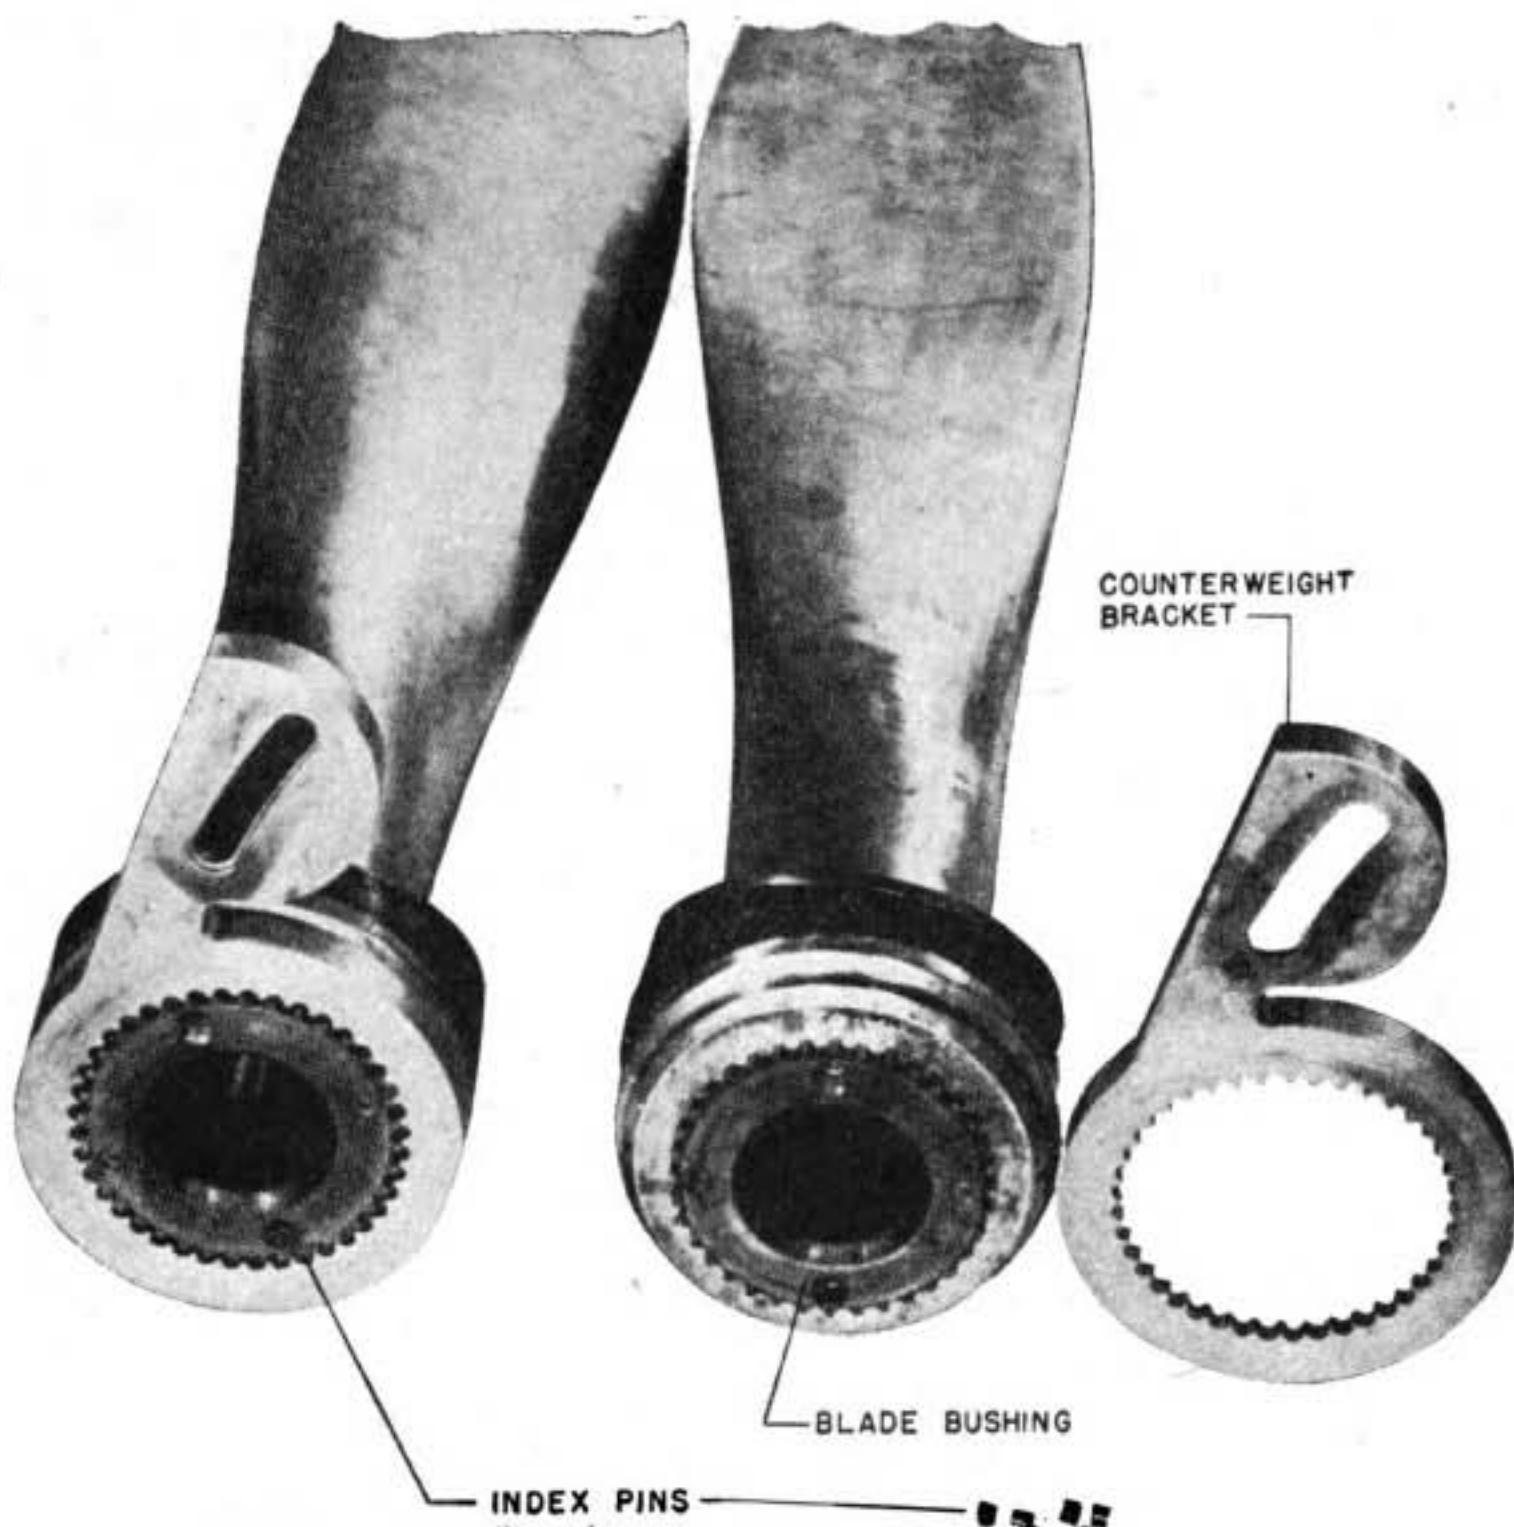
Attachment of counterweight bracket to blade bushing.
